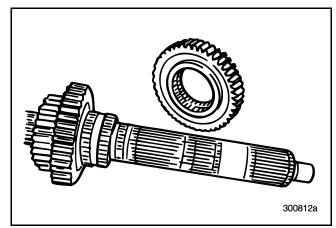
Installing First Speed Gear onto Mainshaft (T313L/T318L Shown)
